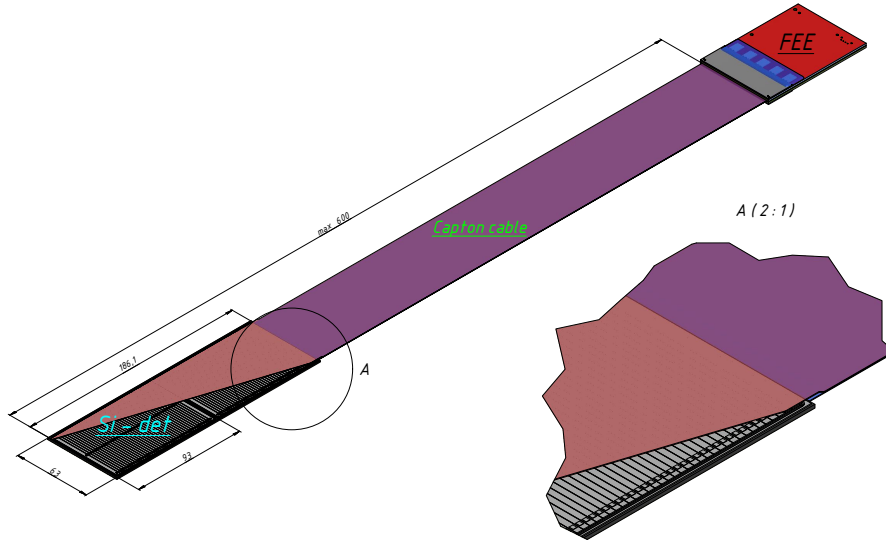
Concept of the barrel DSSD module. All dimensions are in millimeters.
